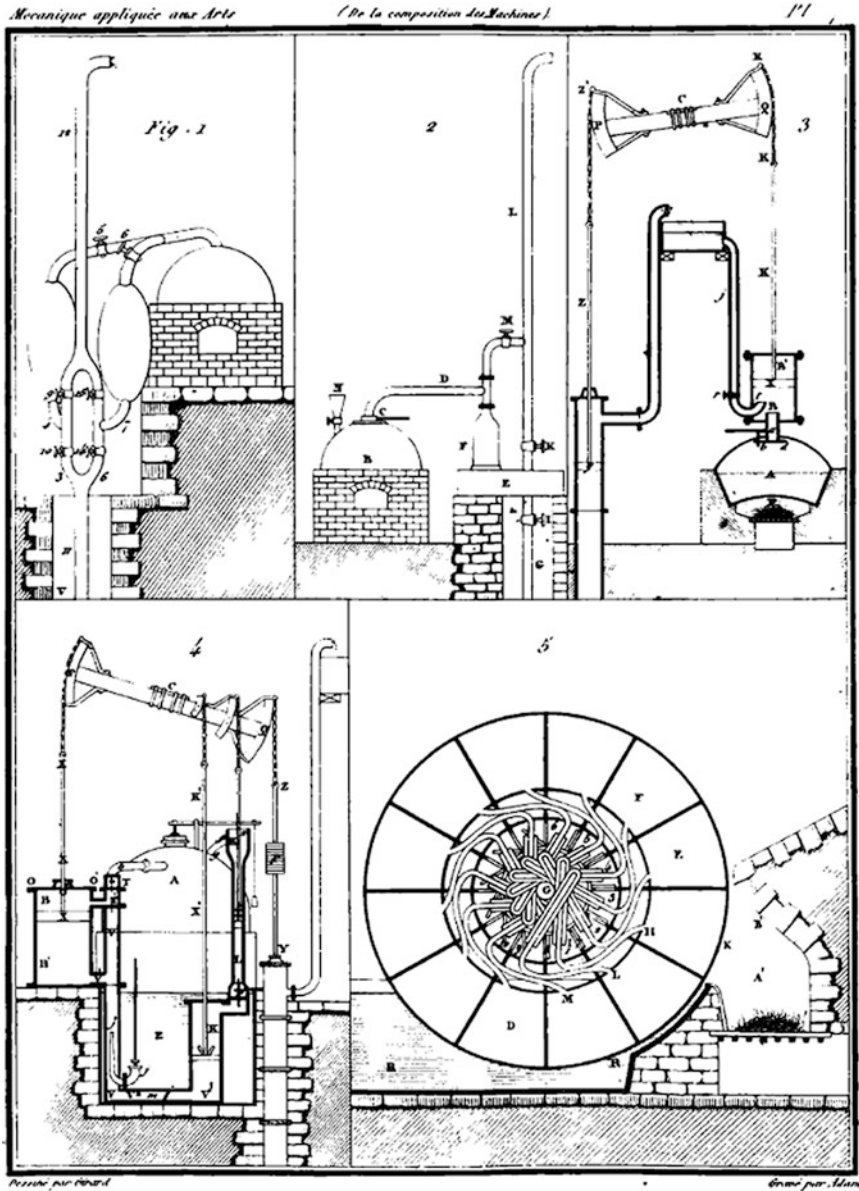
Examples of Borgnis’s study of current engine machines from Pl 7 in (Borgnis 1818a): Watt engine in Fig. 3 and Newcomenn engine in Fig. 4
